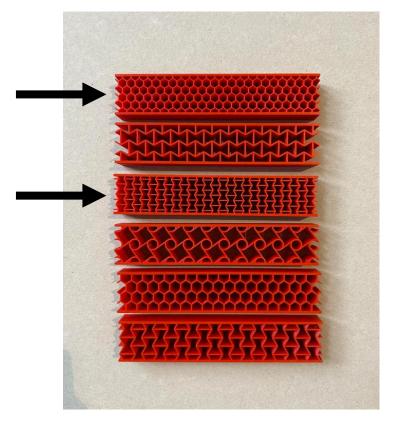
Specimens with wall thickness of 0.6 mm
